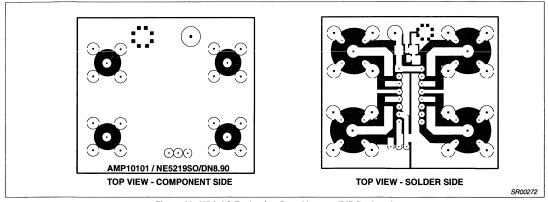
VGA AC Evaluation Board Layout (DIP Package)
